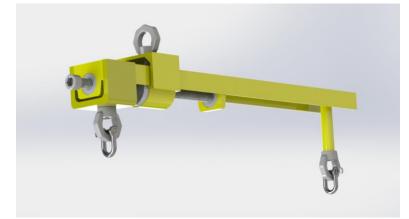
CAD drawing of the proposed adjustable lifting bar, utilizing a power screw
